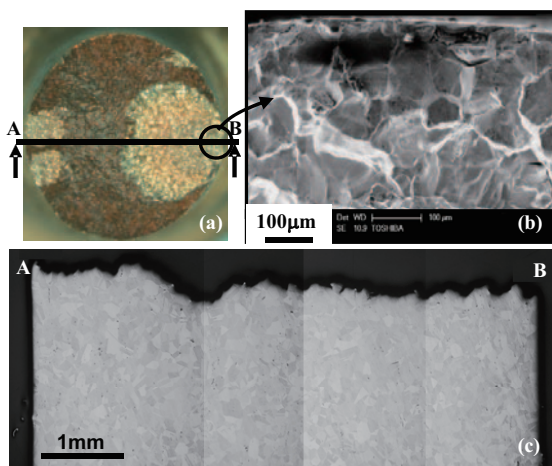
The fracture appearance of smooth sample crept in air under 600°C /750MPa. (a)Viewpoint of fracture surface, (b)Initiation at surface (by SEM), (c)Cross-sectional microstructure
